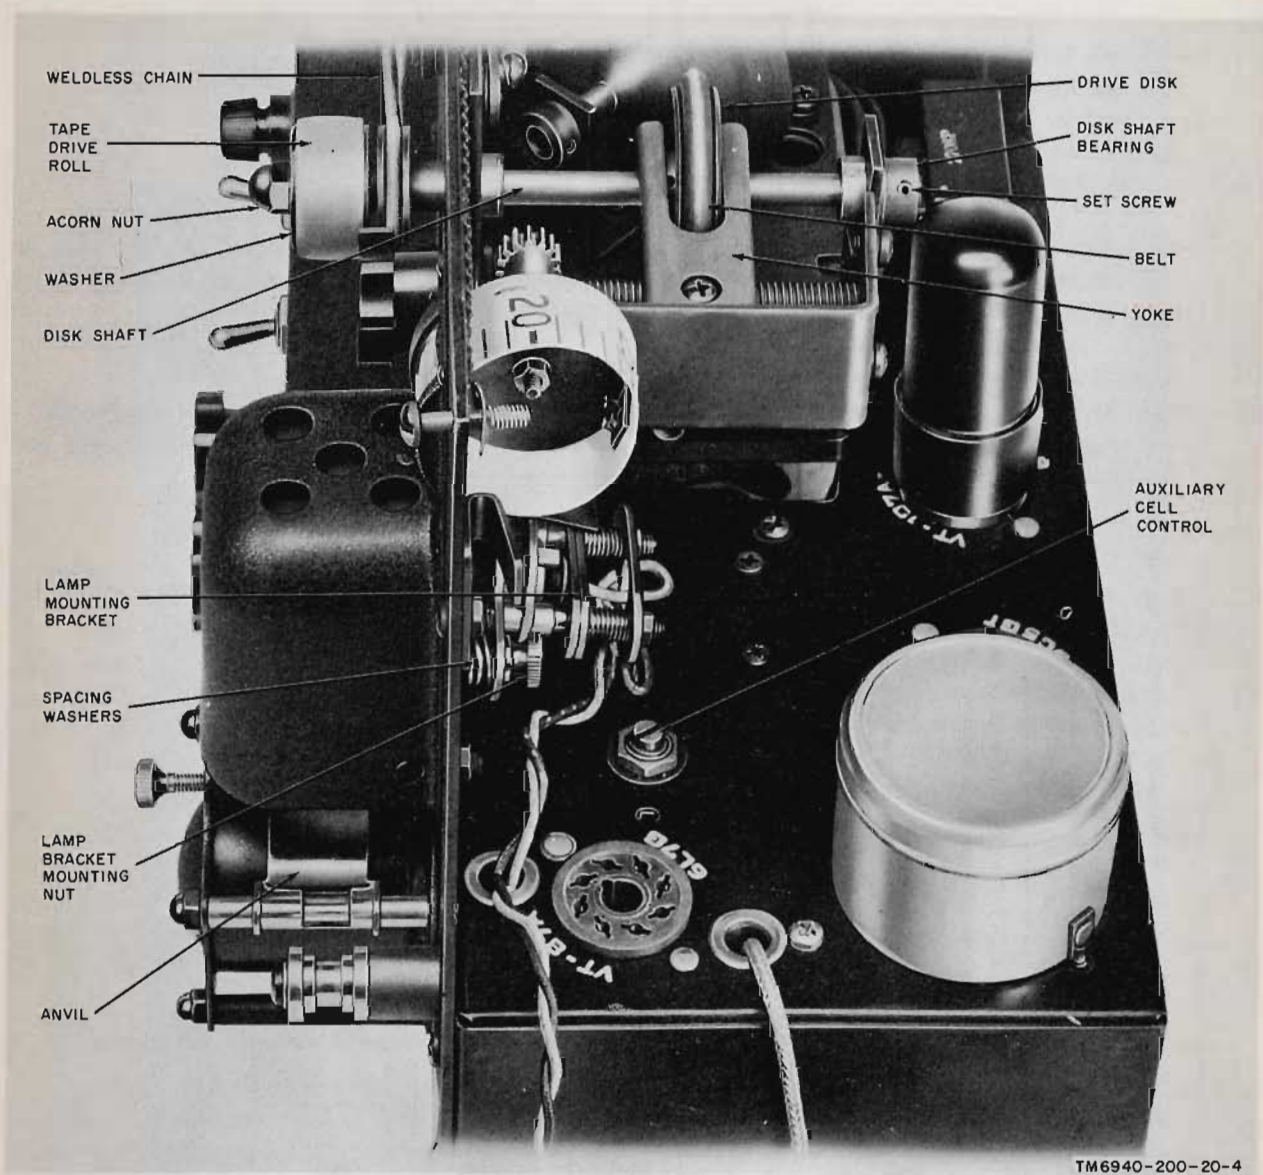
Keyer TG-34-A, showing tape drive roll assembly, auxiliary cell control, and lamp mounting bracket.
